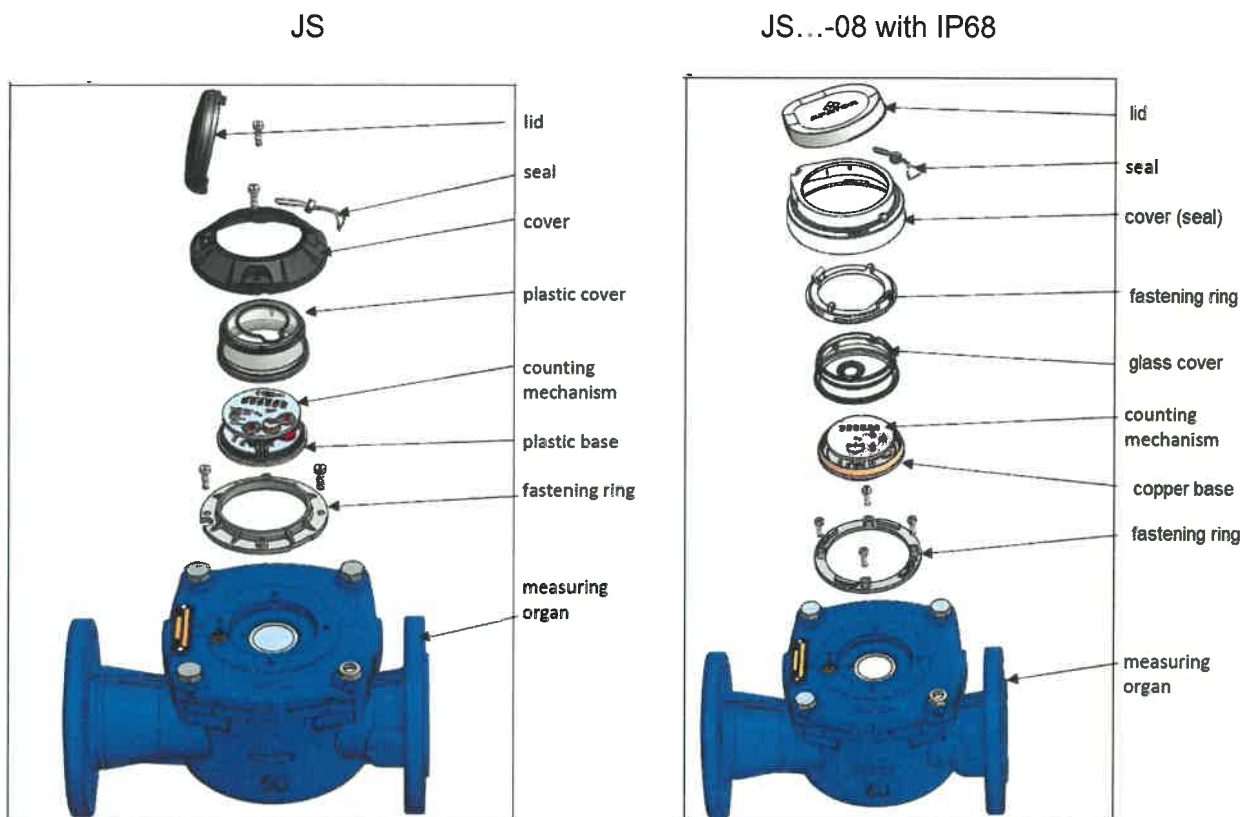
Illustrative exploded views of the water meters (body and calculator)
